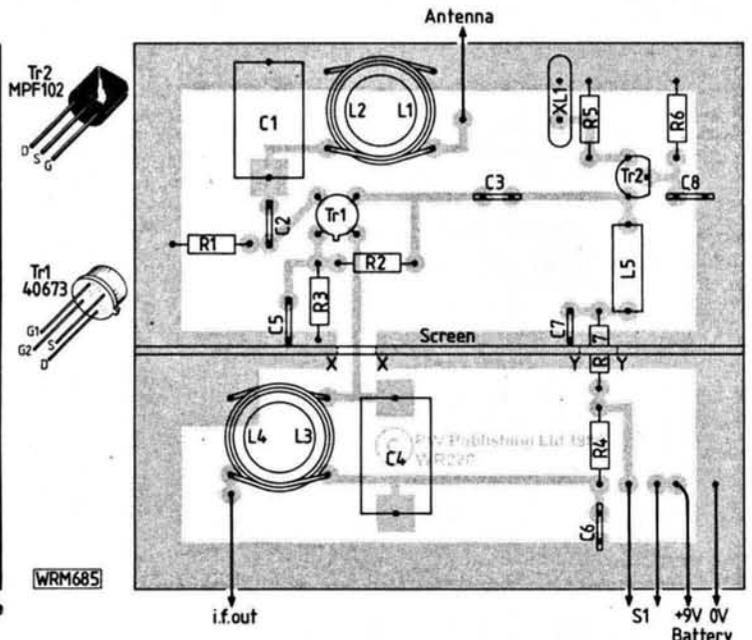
Layout of p.c.b. with the components on the copper track side of the board
